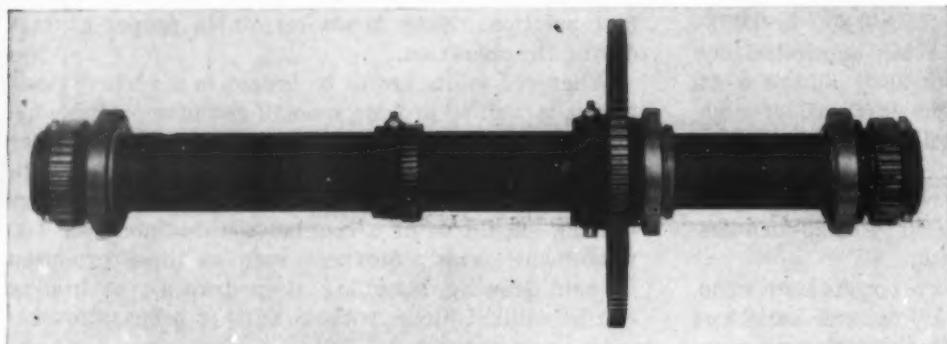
Left—Hollow aircraft turret torque tube has heavy ends and gear-mount silver brazed in a salt bath. The finished part withstands a 2000 inch-pound torque test
